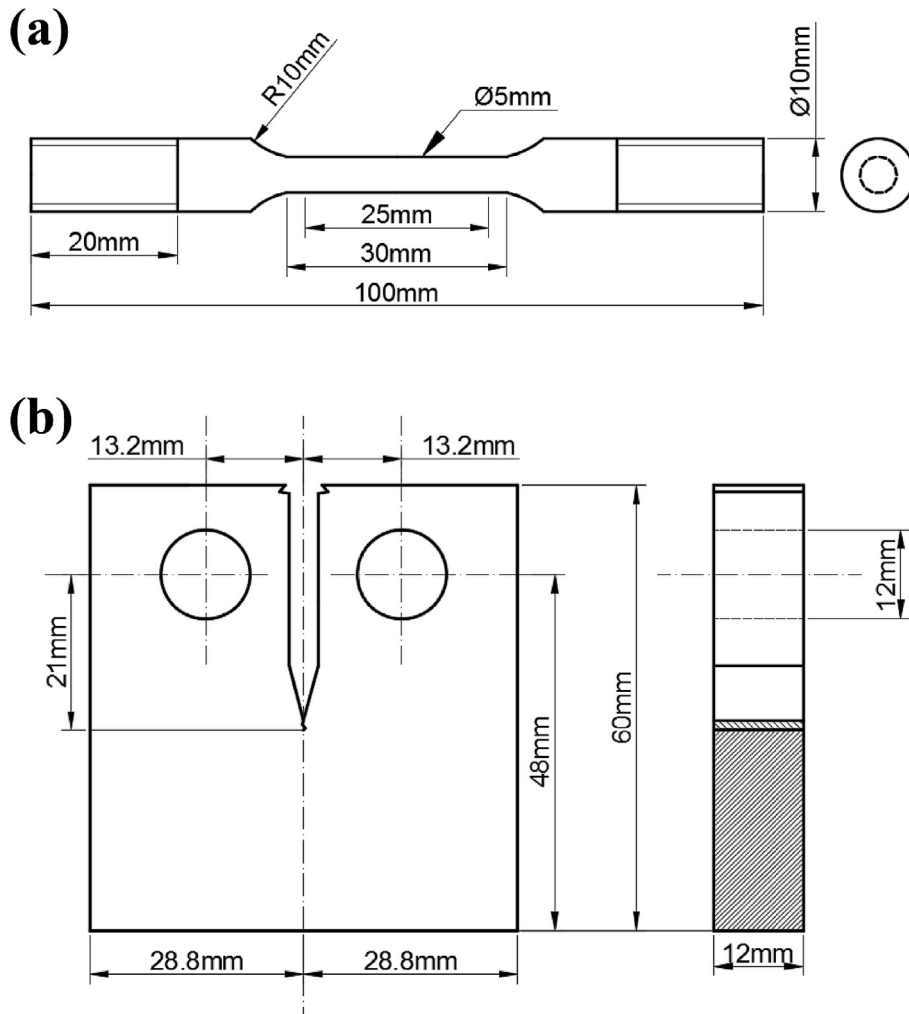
Shape and dimension of (a) the specimen for tension at room temperature, (b) the compact-tension specimen for fracture toughness test.
